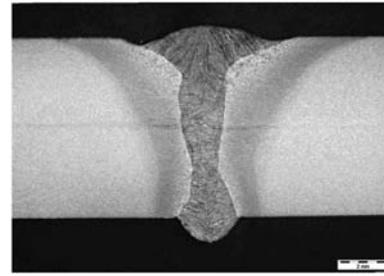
Cross-section through hybrid weld made over joint with 0.5 mm wide gap, welding at 1.2 m/min with wire feed rate of 9 m/min.
